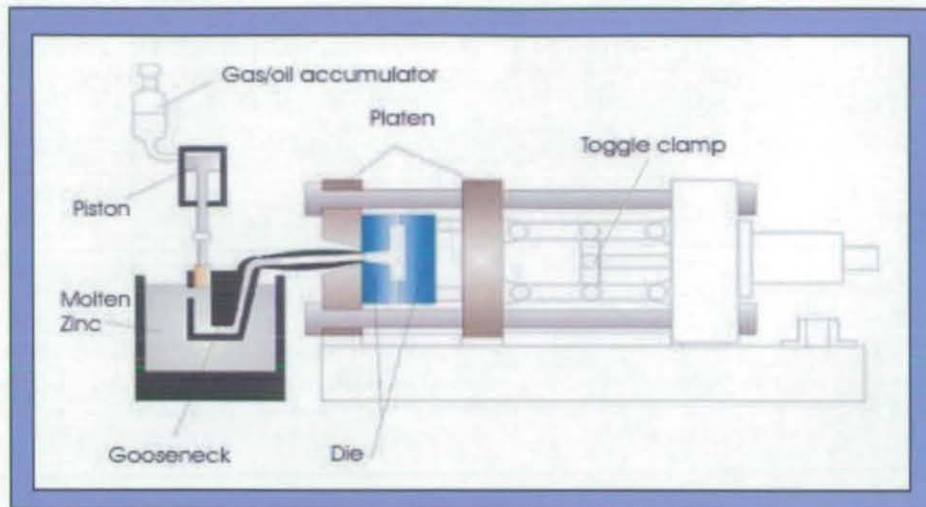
4 Hot chamber machine diagram illustrates the plunger mechanism, which is submerged in molten metal (Dynacast, 2004)
